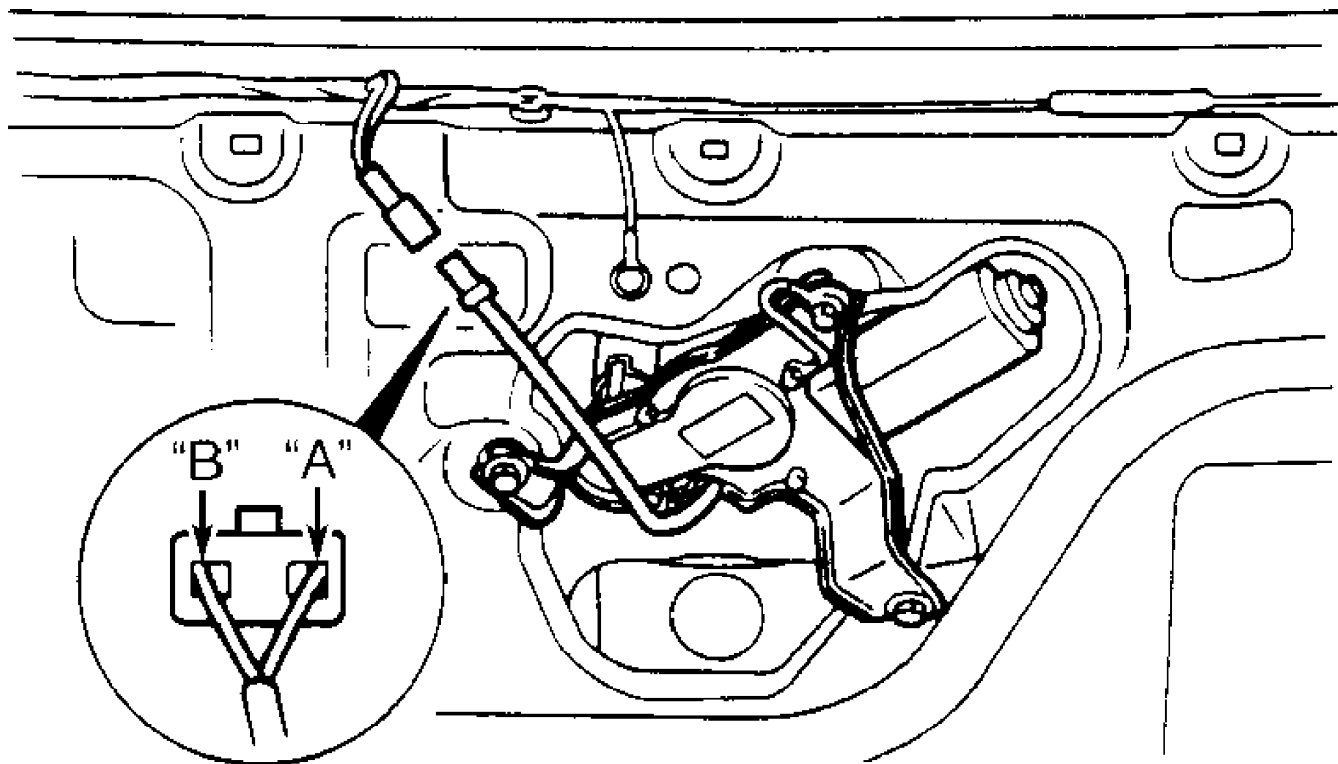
Identifying Rear Wiper Motor Terminal (MX-6 & 626)
